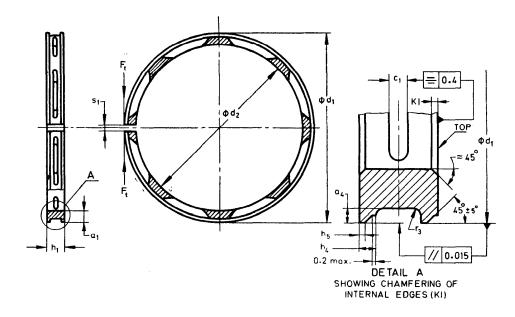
DOUBLE BEVELLED SLOTTED OIL CONTROL RING (G-RING)
